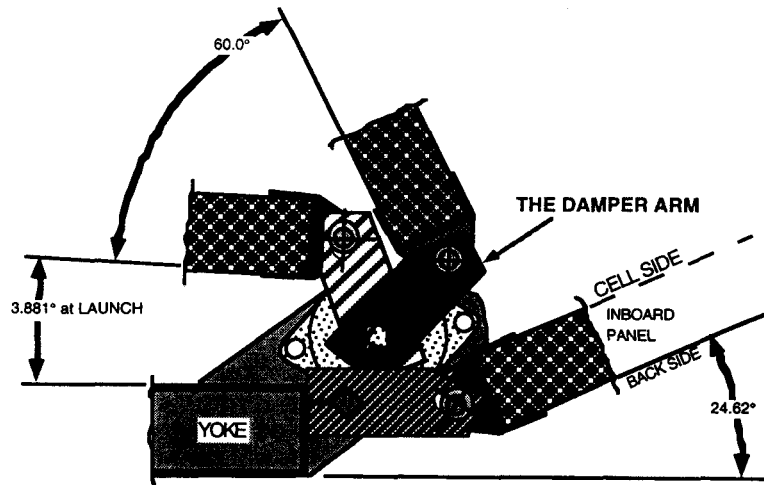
Detail of the Broken Solar Panel Damper Assembly
